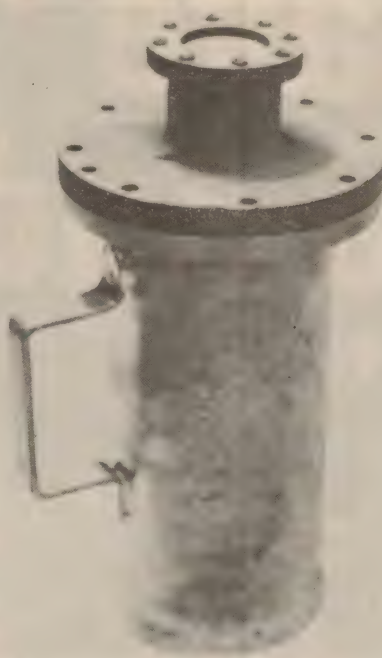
(above): A heavy duty housing assembly, of the type which can be provided if workshop facilities are available. Sealing is achieved with neoprene O-rings.
